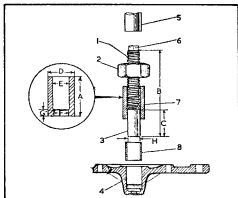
Commutator end bracket bush and self extracting type tool assembly
